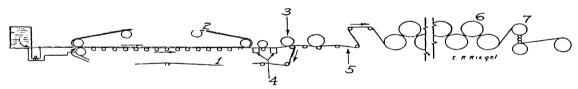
A simplified Fourdrinier machine showing the principal parts: 1, the wire screen; 2, deckle straps; 3, couch roll; 4, suction boxes; 5, wet sheet of paper; endless felt which supports the paper not shown; 6, drying cylinders; 7, calender.
